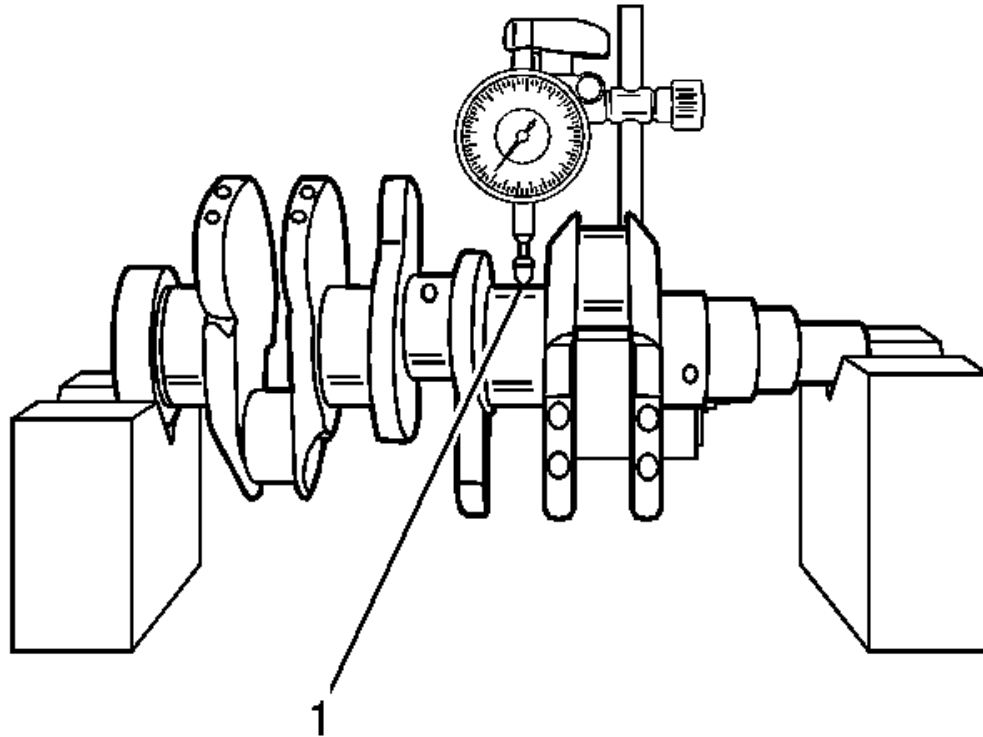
Measure Crankshaft Bending (Out-Of-Round)
